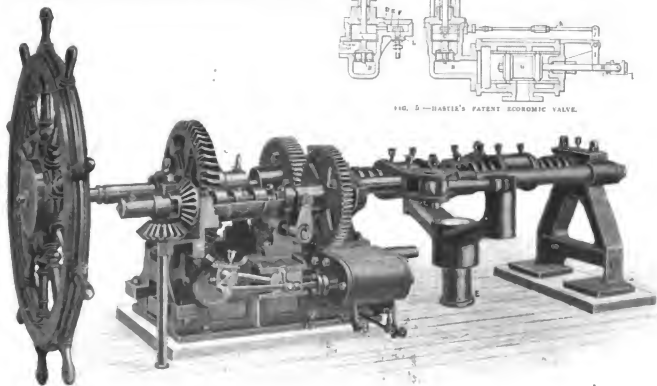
WILLIAMSON BROTHERS' COMBINED STEAM AND HAND SCREW STEERING ENGINE OF THE WORM-GEAR TYPE.
